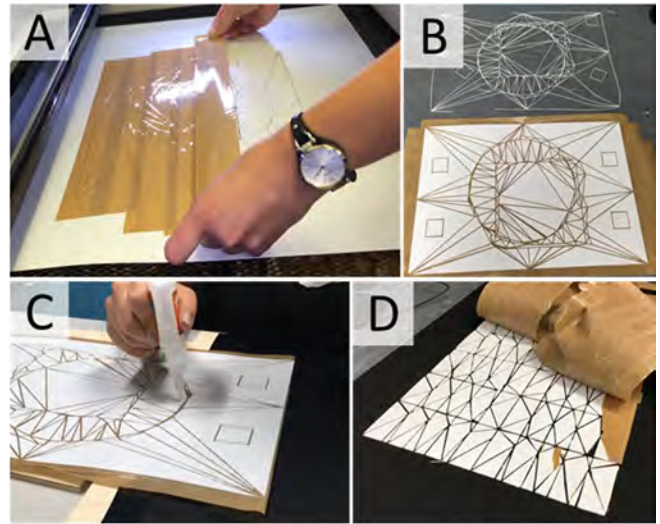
Securing shapes on surface (A); Removing spacing guides (B); Gluing surface to Spandex (C); Removing tape (D).
